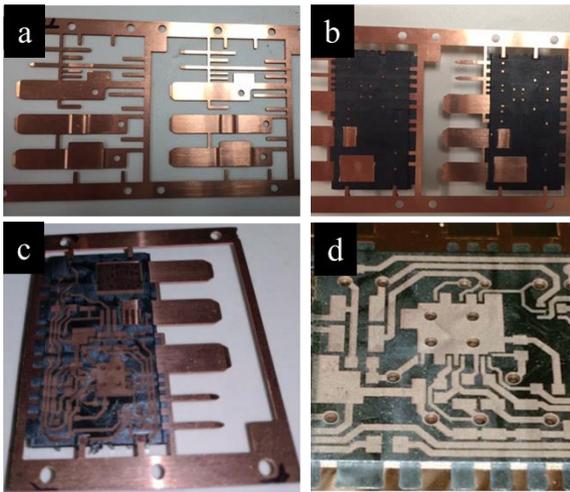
Four steps of ASEP manufacturing: a) metal stamping b) over molding with LCP c) laser marking the surface d) inkjet printing of nanoparticle metal.
